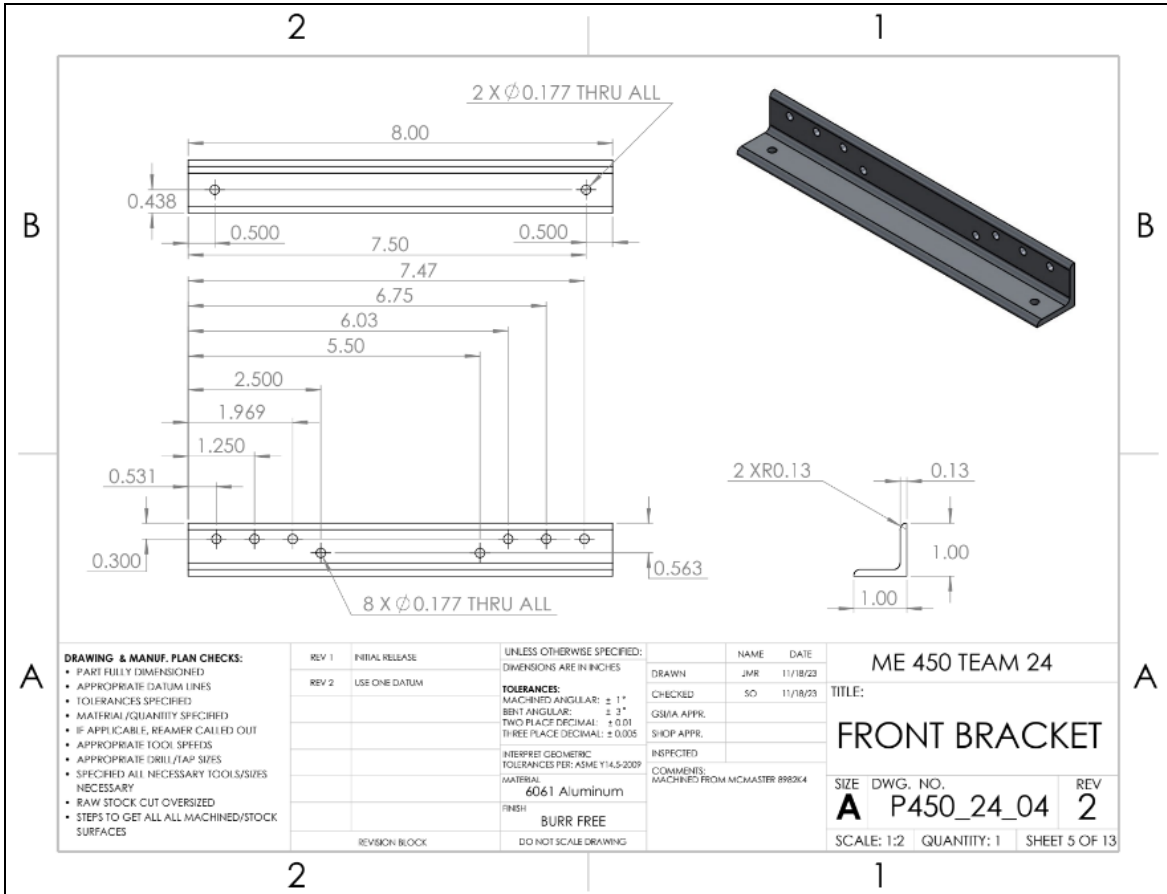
Manufacturing drawing for the front bracket component of the beta design.
